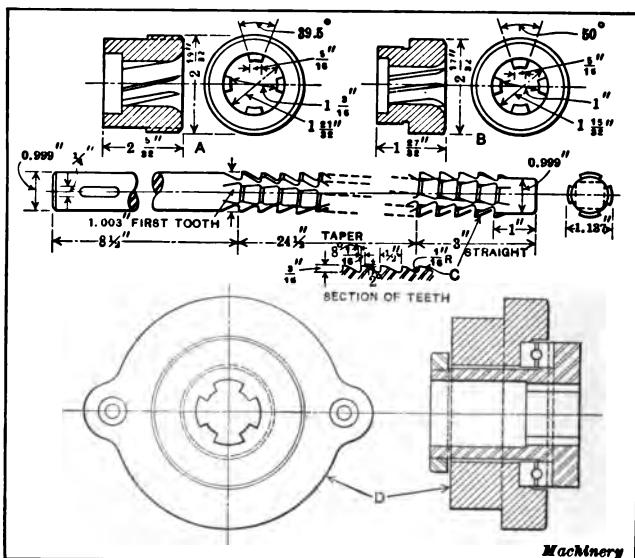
Broach C and Ball-bearing Thrust Plate D, used for broaching Spiral Grooves in Work shown at A and B
